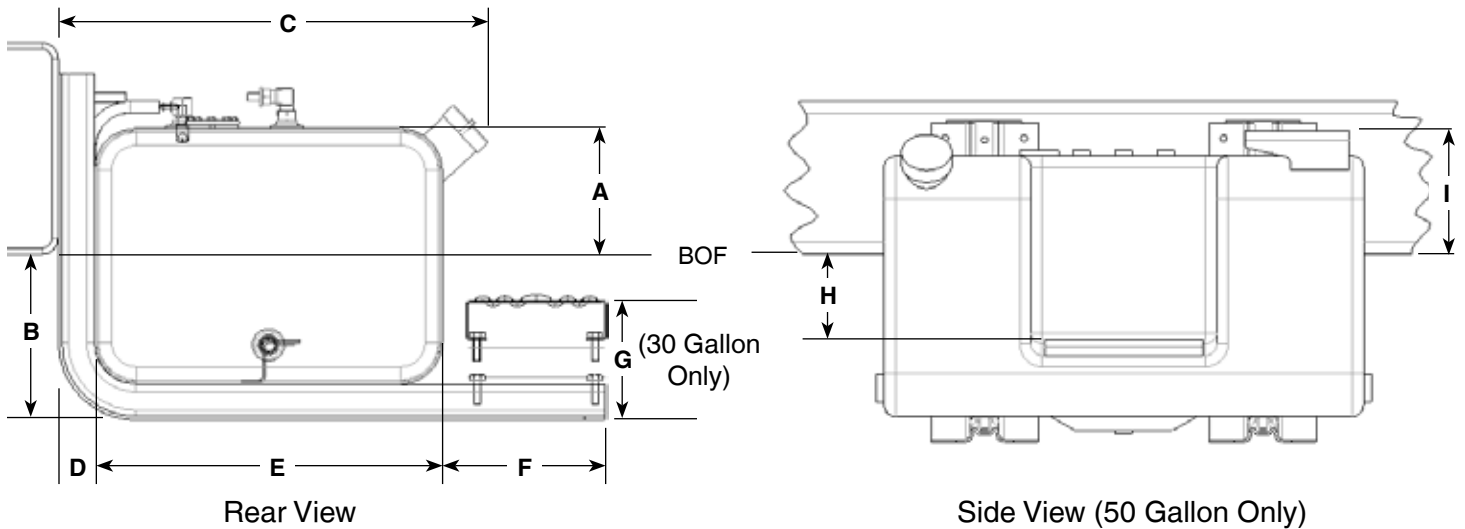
Rectangular Fuel Tank Measurements [inches (mm)]
